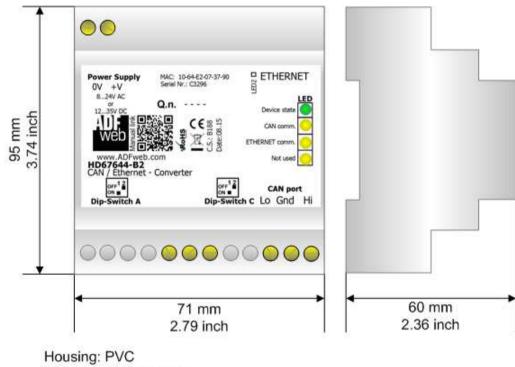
Mechanical dimensions scheme for HD67644-A1
